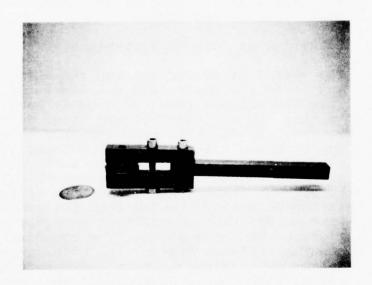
Experimental Viton Rubber Pad Etching Fixture:
